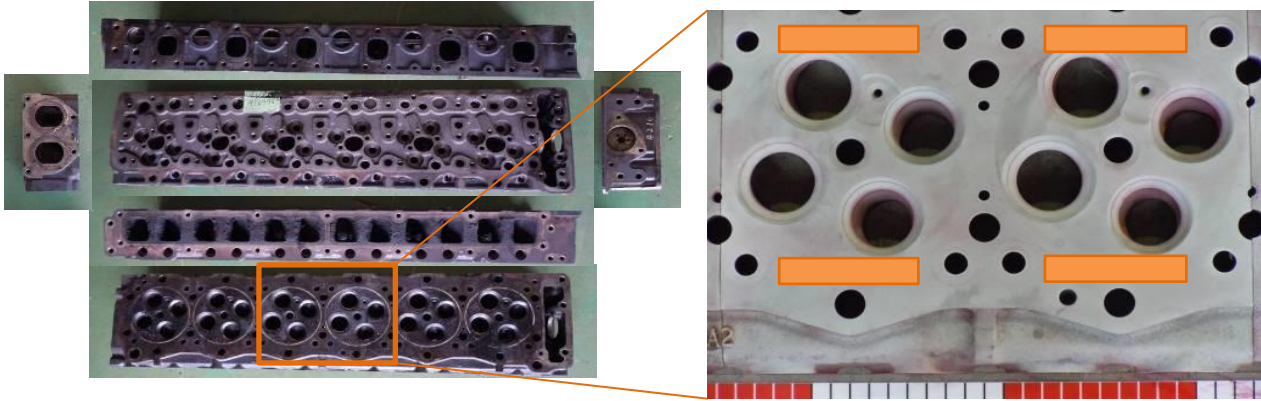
Location of tensile test and fatigue test specimens cut out from a cylinder head..
